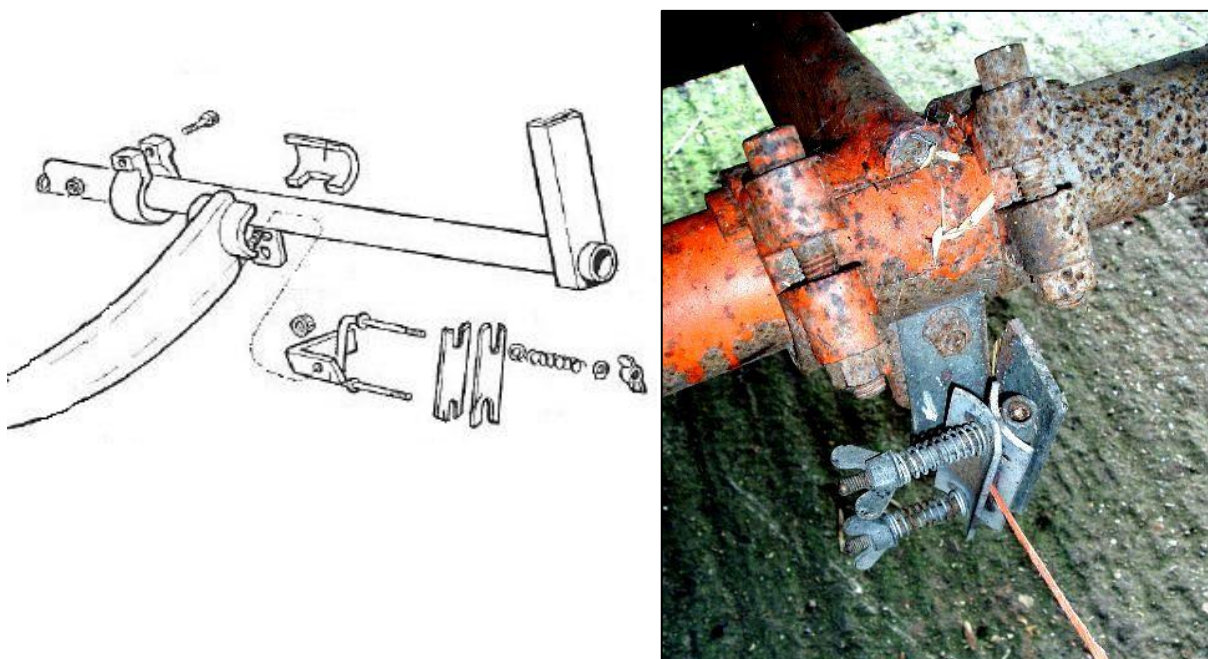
Mk1/1a Needle mounting – Needle is clamped to the (*tubular*) Needle Frame & the stud on base of the Needle passes through and is secured to a slotted plate, welded to the underside of the frame.
